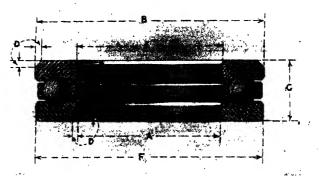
R. AND M. DOUBLE THRUST BEARING
